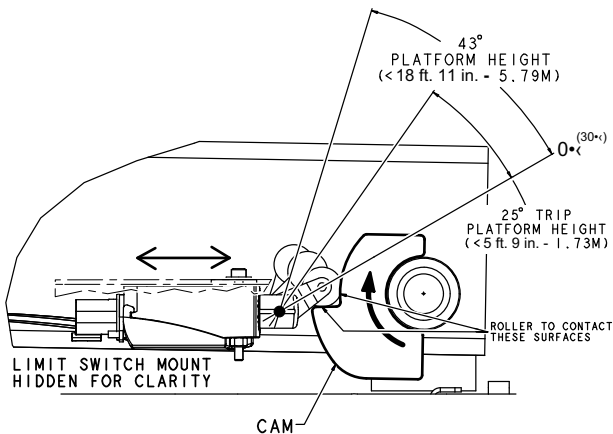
1932RS/6RS - Elevation Limit Switch Adjustment
